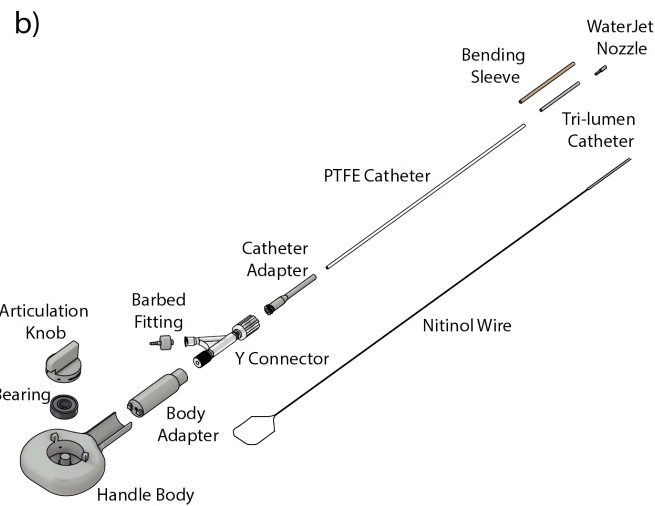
a) Picture of the Prototype. b) Exploded view of the Waterjet Necrosectomy Device (WAND).
